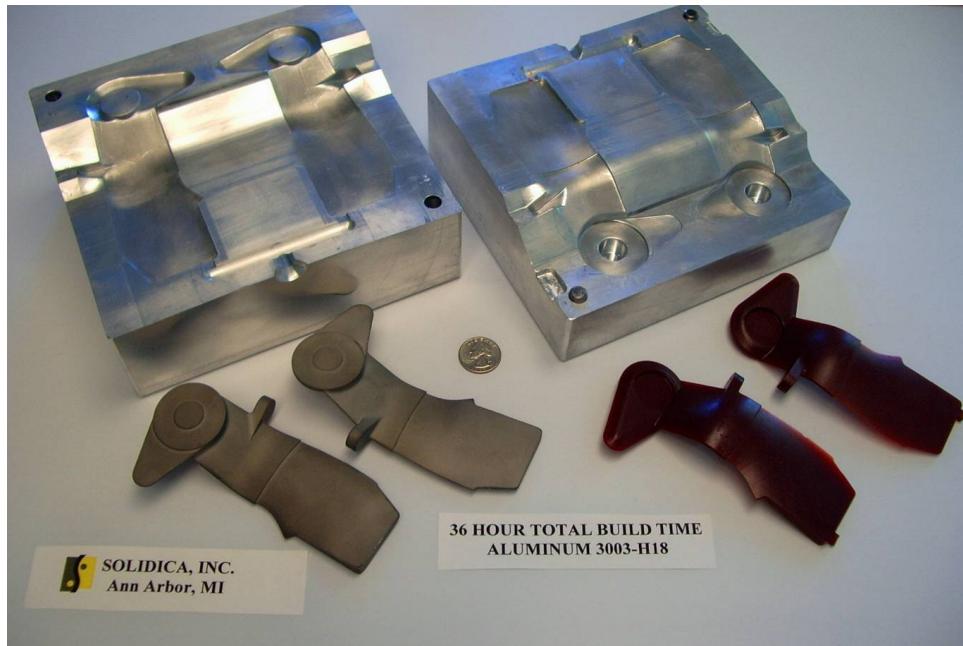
Investment casting pattern tooling produced via UC with wax patterns and parts.
